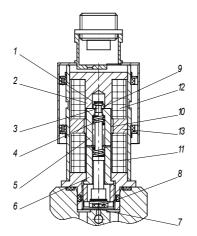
The structural layout of the valve with two-polarized electromagnetic drive: 1 – head of the rod; 2 – the electromagnet 3 – neck of the rod; 4 – buffer spring, 5 – slide (anchor), 6 – bottom feet, 7 – seat 8 – slide 9 -lock washer, 10 – separator tube; 11 – closing winding, 12 – opening winding 13 – permanent magnet
